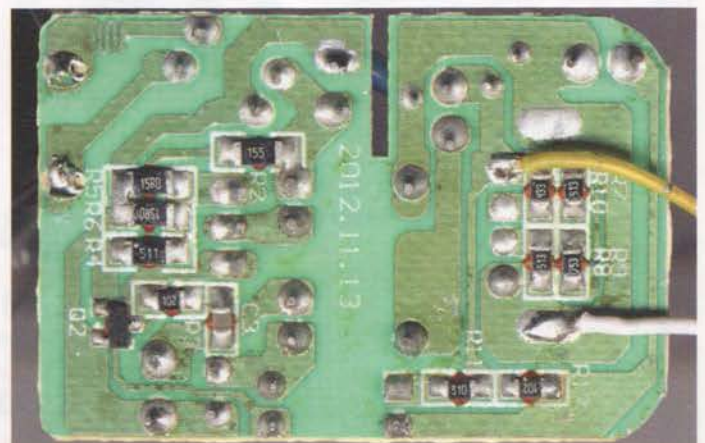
Charger 2 PCB solder side. Note the apology for a 'fuse', top left.
